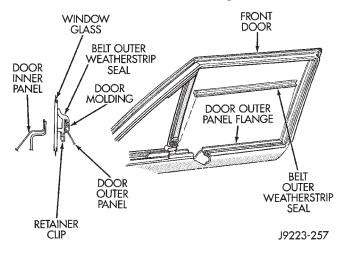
Front Door Belt Outer Weatherstrip Seal
